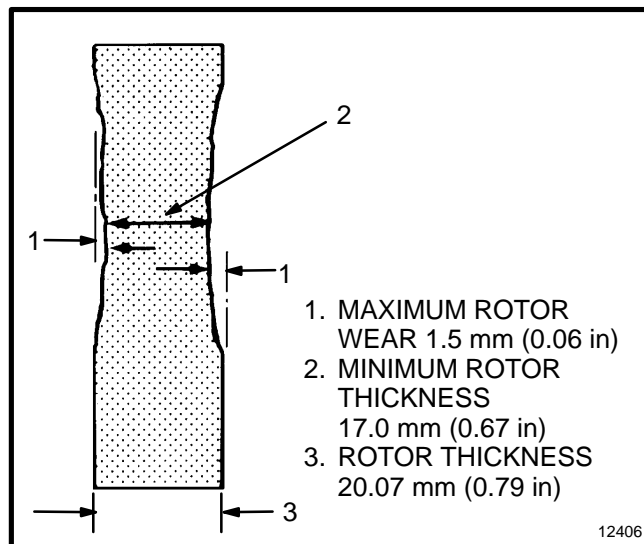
INSPECT THE ROTOR FOR THE PARKING BRAKE AND AUXILIARY CALIPERS
